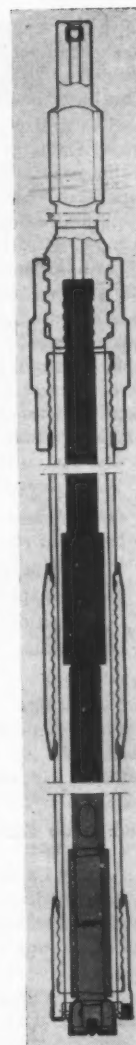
, above, shows a section of the Sandvik Coromant drilling equipment
